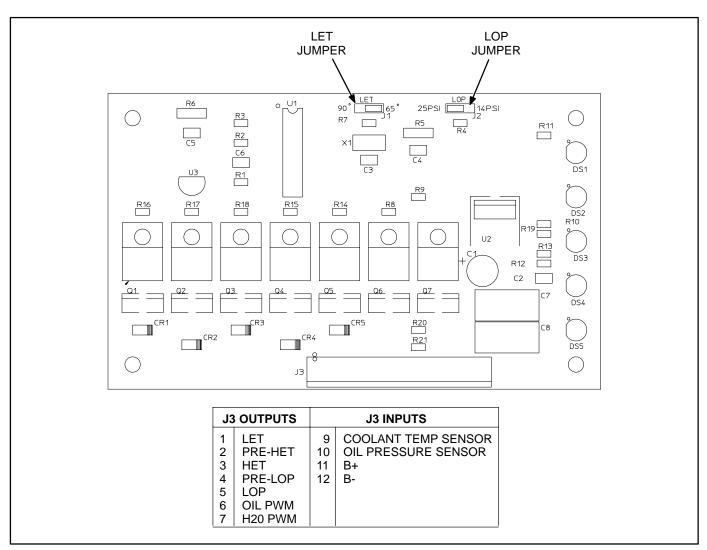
SENSOR BOARD PCB ASSEMBLY
